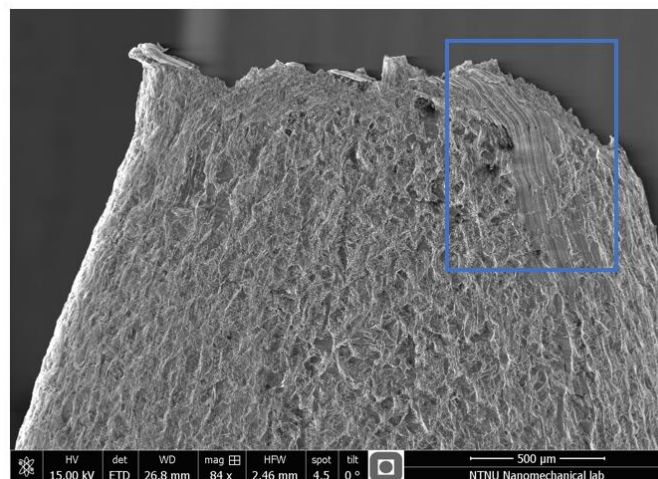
0 Ni Air side view at 84X. The smooth area marked in the blue box was caused by measuring the diameter of the fracture surface area with callipers after SSRT. This was noted, and calliper measurements were not taken of any of the other samples after fracture.
